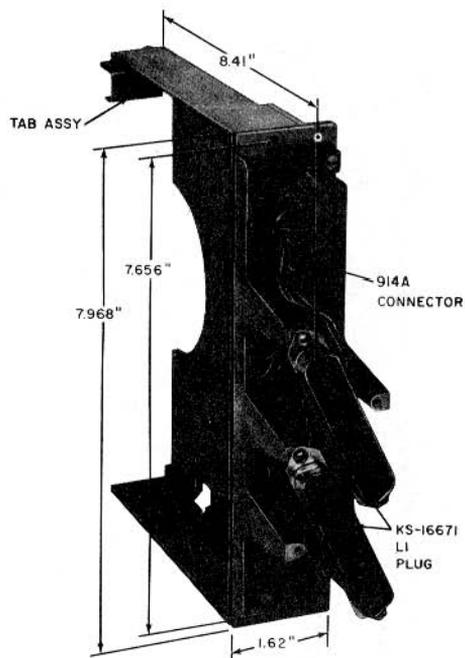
Φ 69D Apparatus Mounting For 8-Inch KTUs Φ
